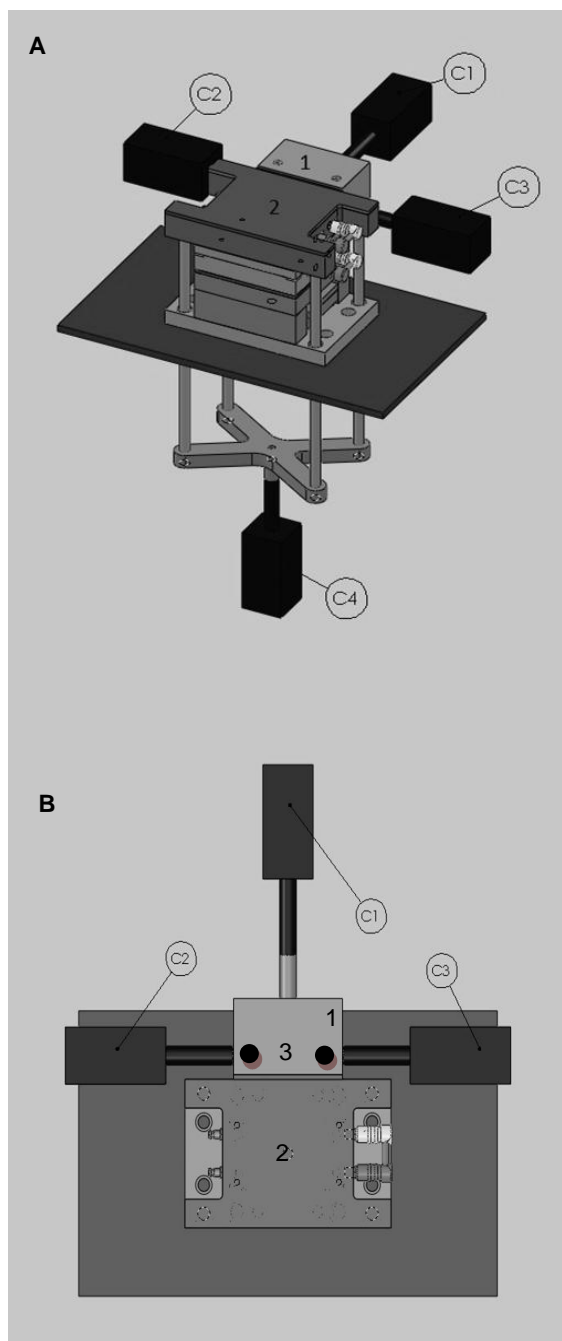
Prototype NYRIM processing machine concept: A – side view; B – top view. Legend: 1 – pre-heated camera for jet-mixing; 2 – the top plate of the mold; 3 – inlets for the two material batches of the pre-mixing camera; C1 – C4: hydraulic cylinders.
